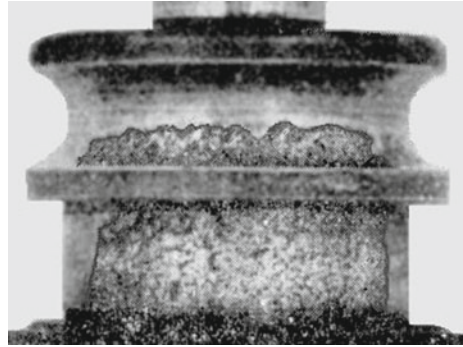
Spalling on the running surfaces of a drill bit support (large roll and ball) [139]
